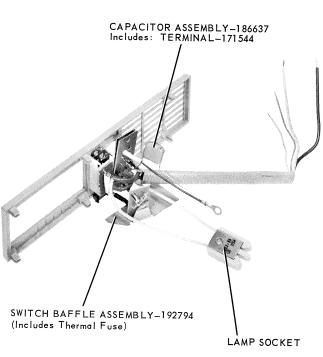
GRILLE ASSEMBLY (760)—187010 (850)—187014
